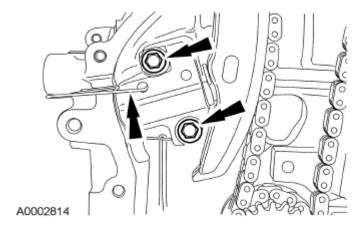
Locating Timing Chain Tensioner And Bolts Courtesy of FORD MOTOR CO.
